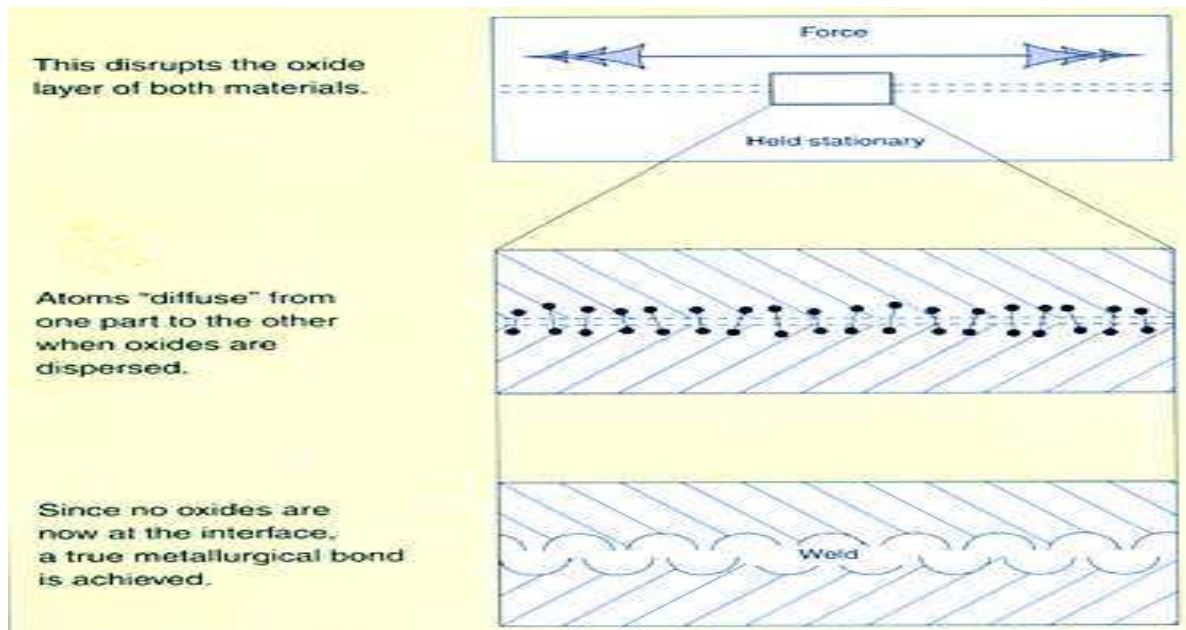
metallurgical bonding of ultrasonic welding
